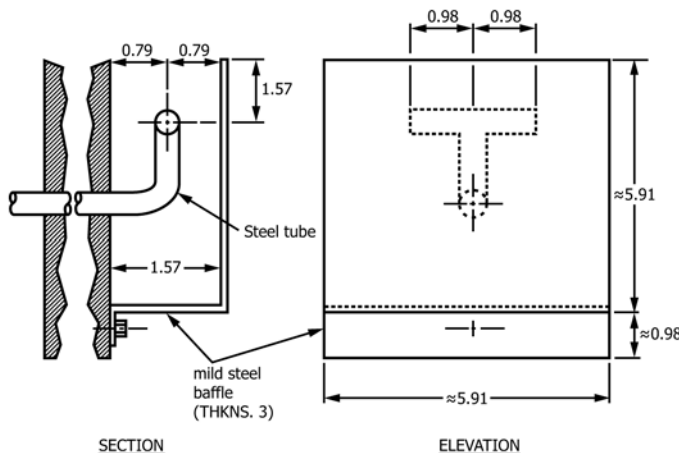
Static Pressure-Measuring Device Dimensions in Millimetres
